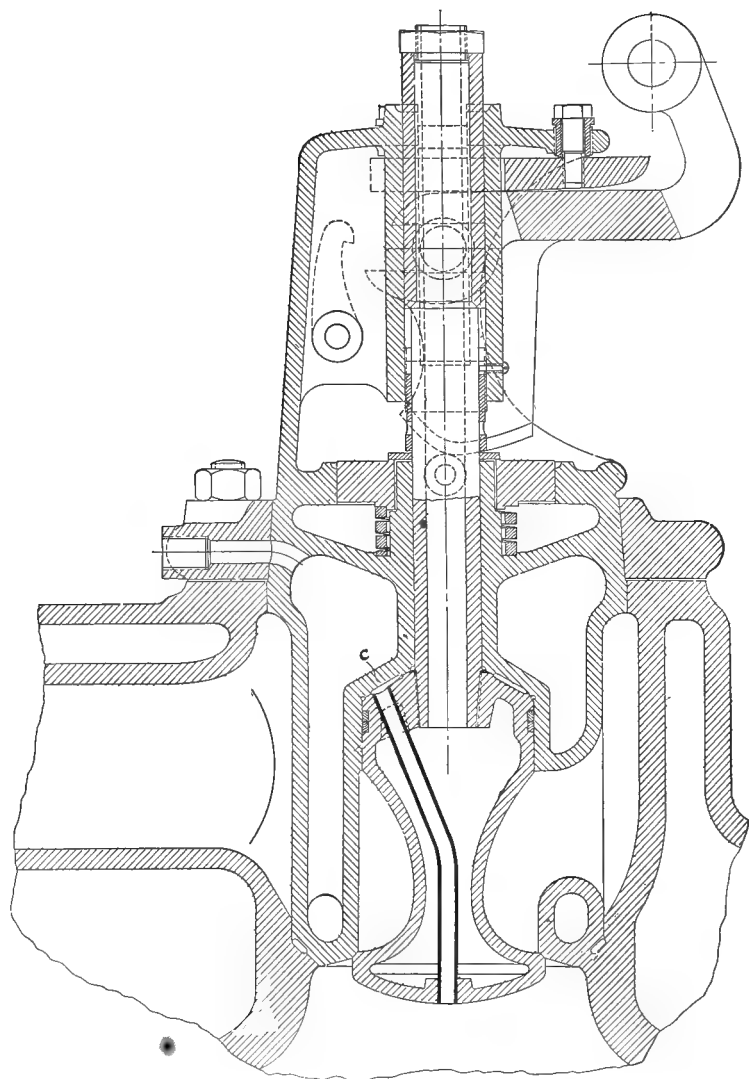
Exhaust Valve on Top End of Cylinder (Reichenbach).
